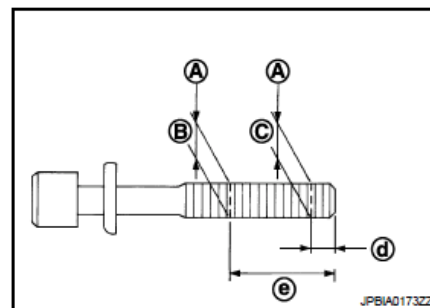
Identifying Cylinder Head Bolts Outer Diameter
